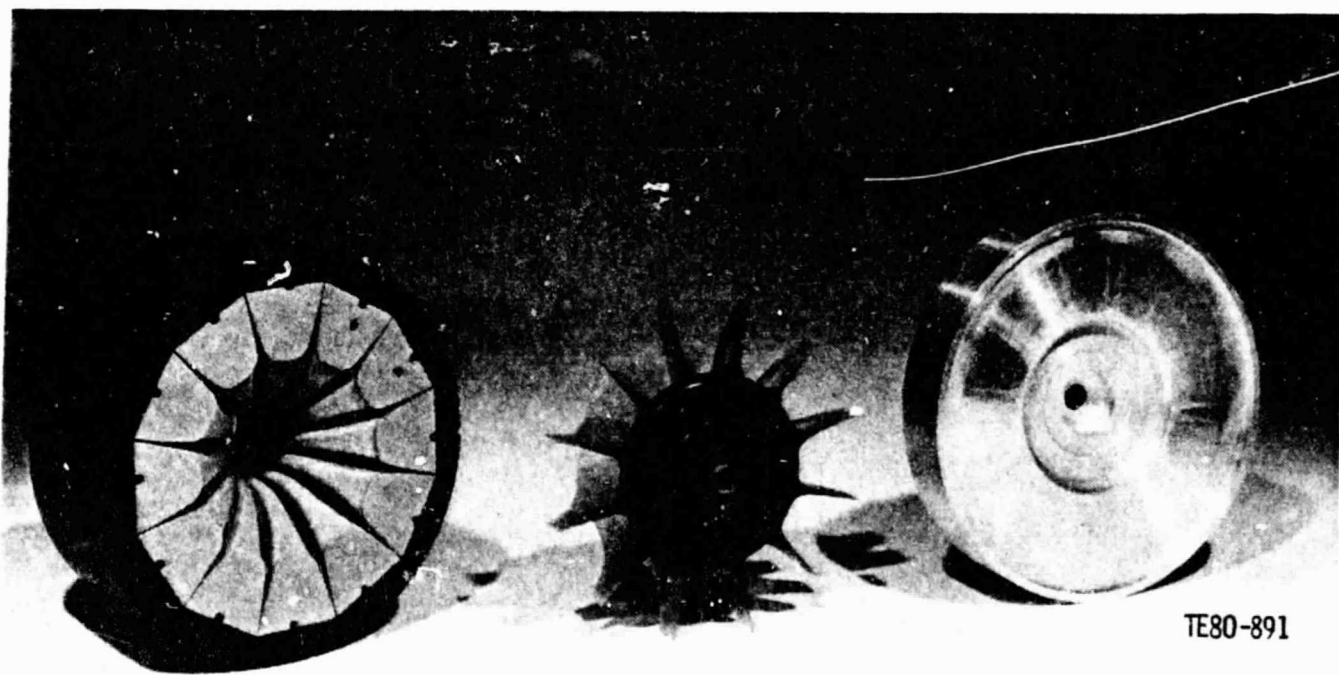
Mold and Turbine Wheel Epoxy Castings.
